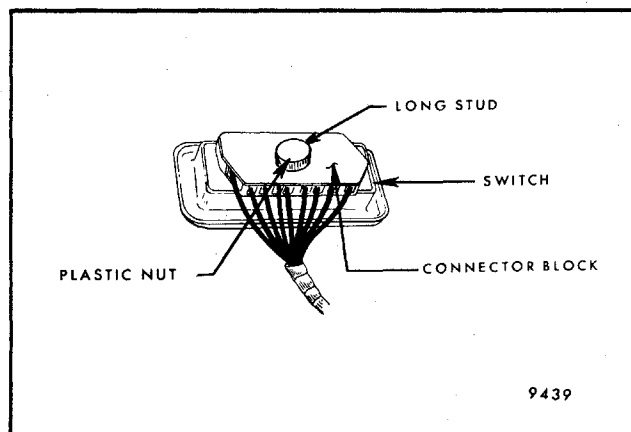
Four Button Trim Pad Switch - Armrest Switch Similar
